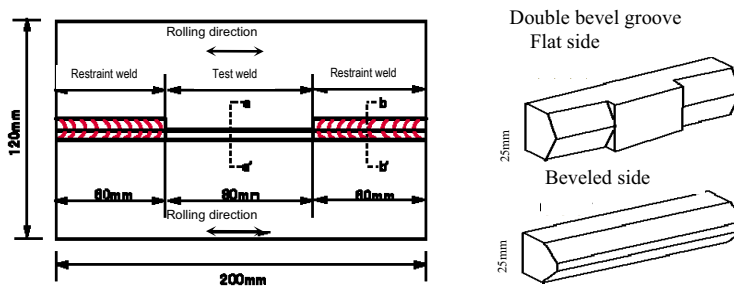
Weld cracking test specimen and joint geometry.
